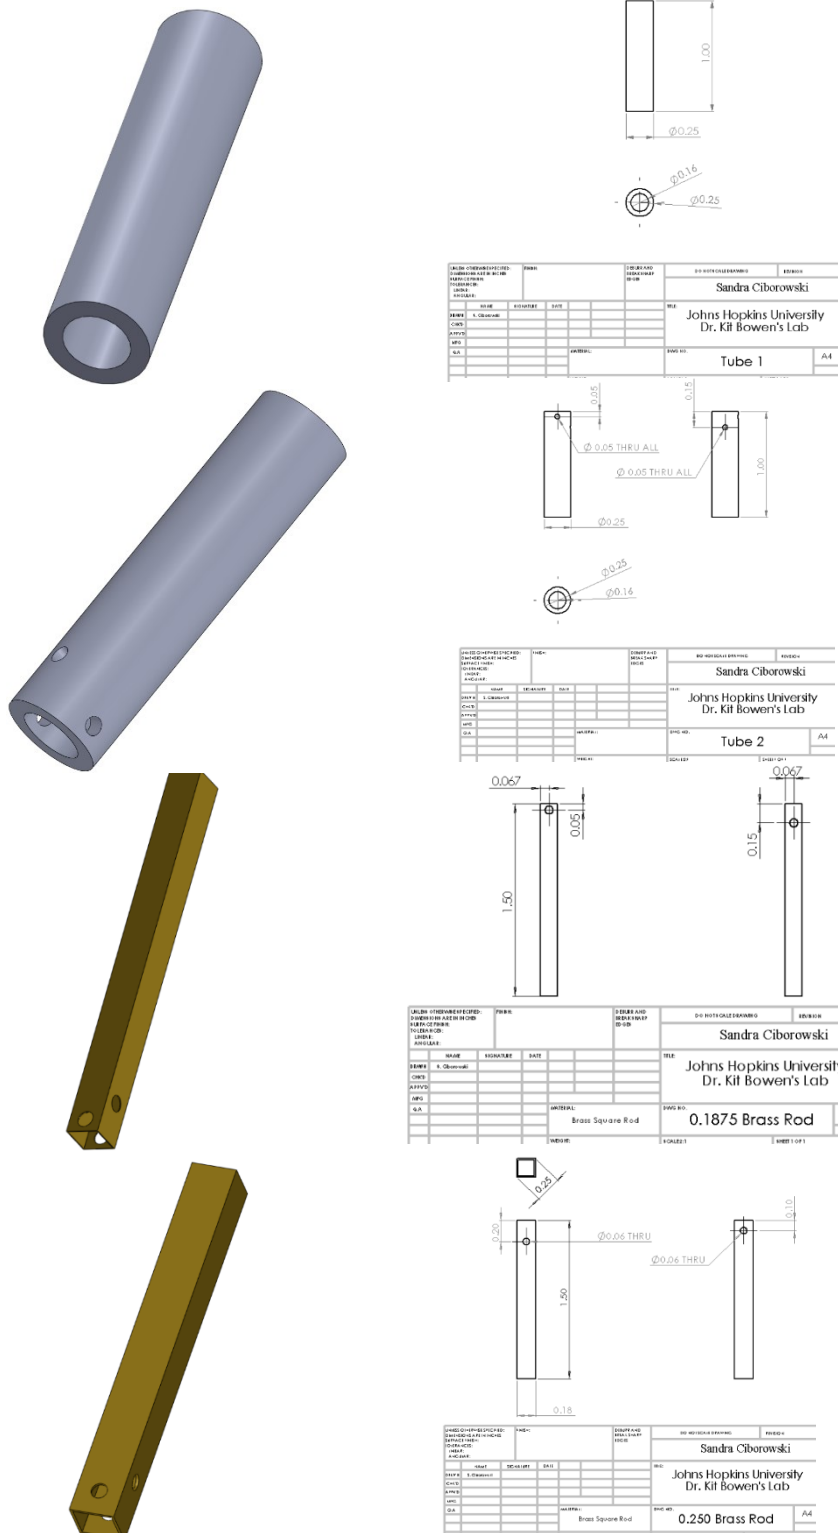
(A) Tube which Connects the Motor to its Gear; (B) Tube which Connects the Rigid Coupling to the Gear; (C) Smaller Brass Rod; (D) Larger Brass
